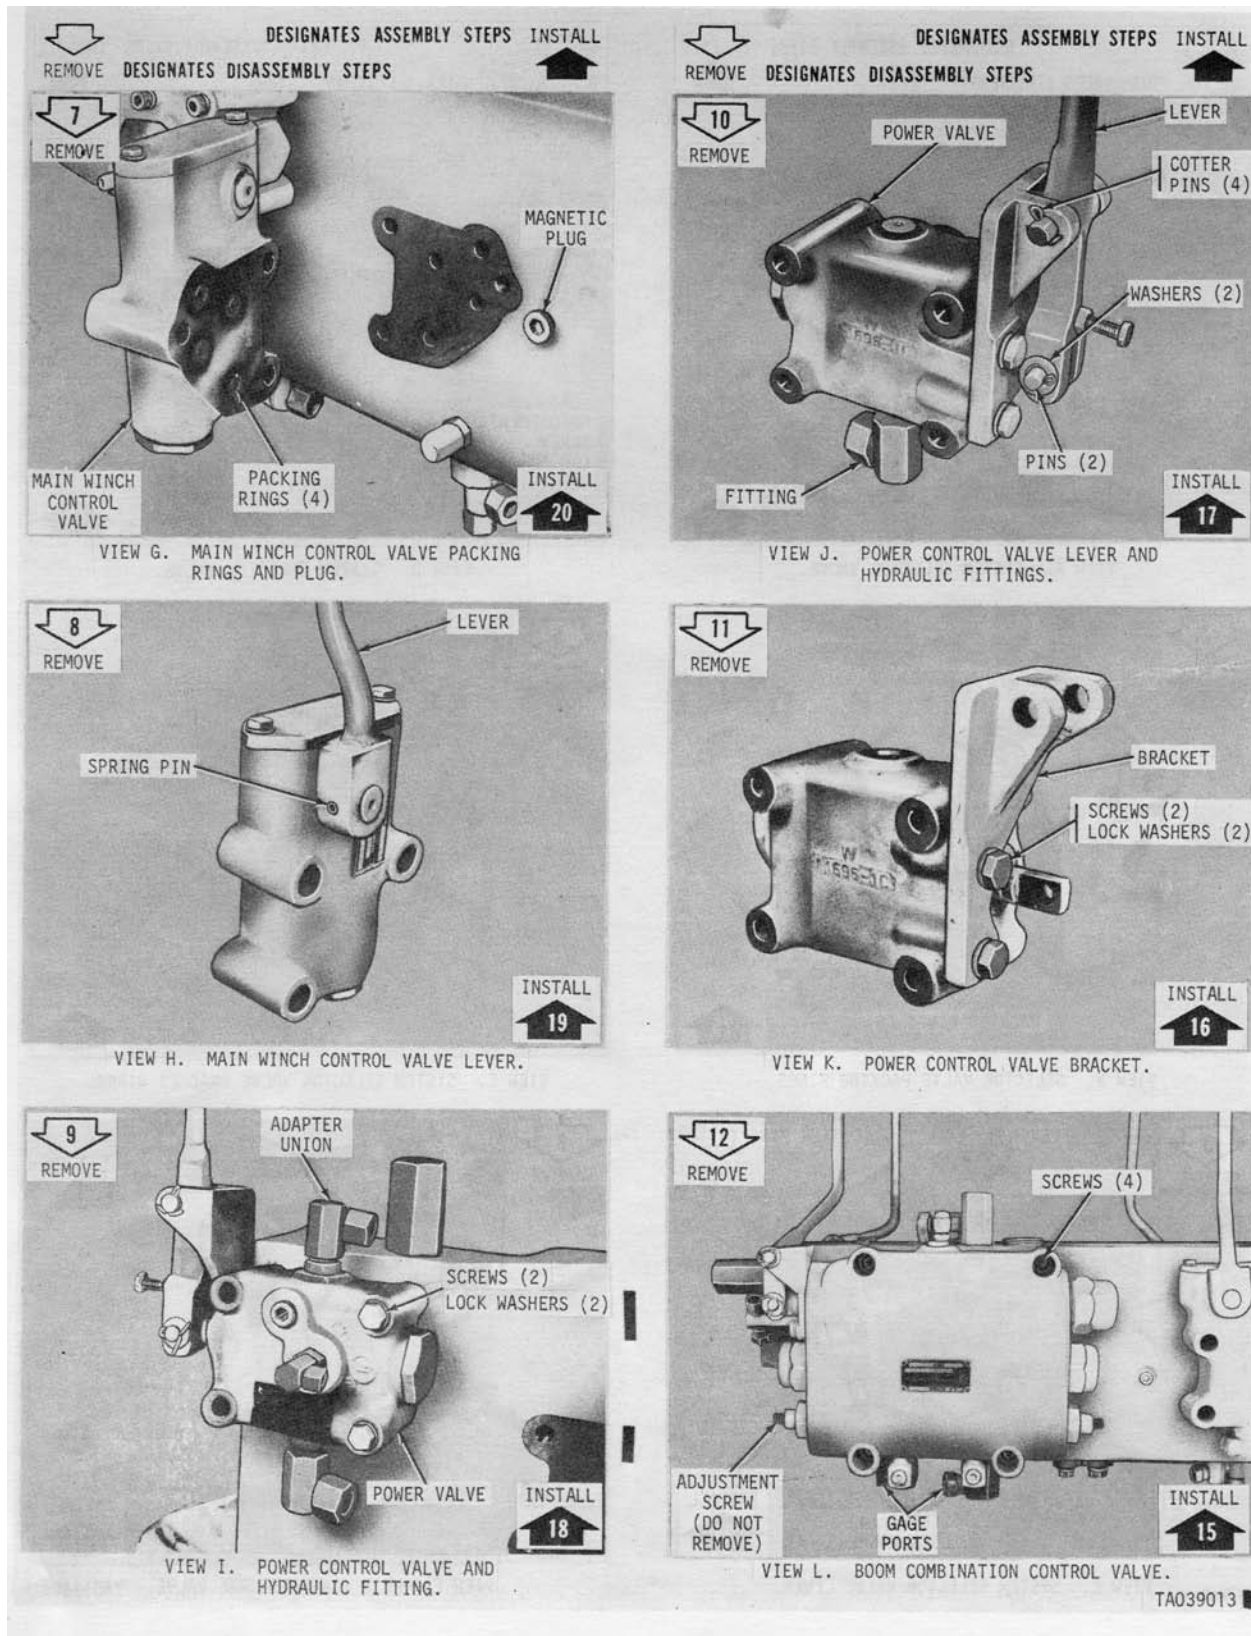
Disassembly of hydraulic subplate assembly into subassemblies (Sheet 2 of 5).
